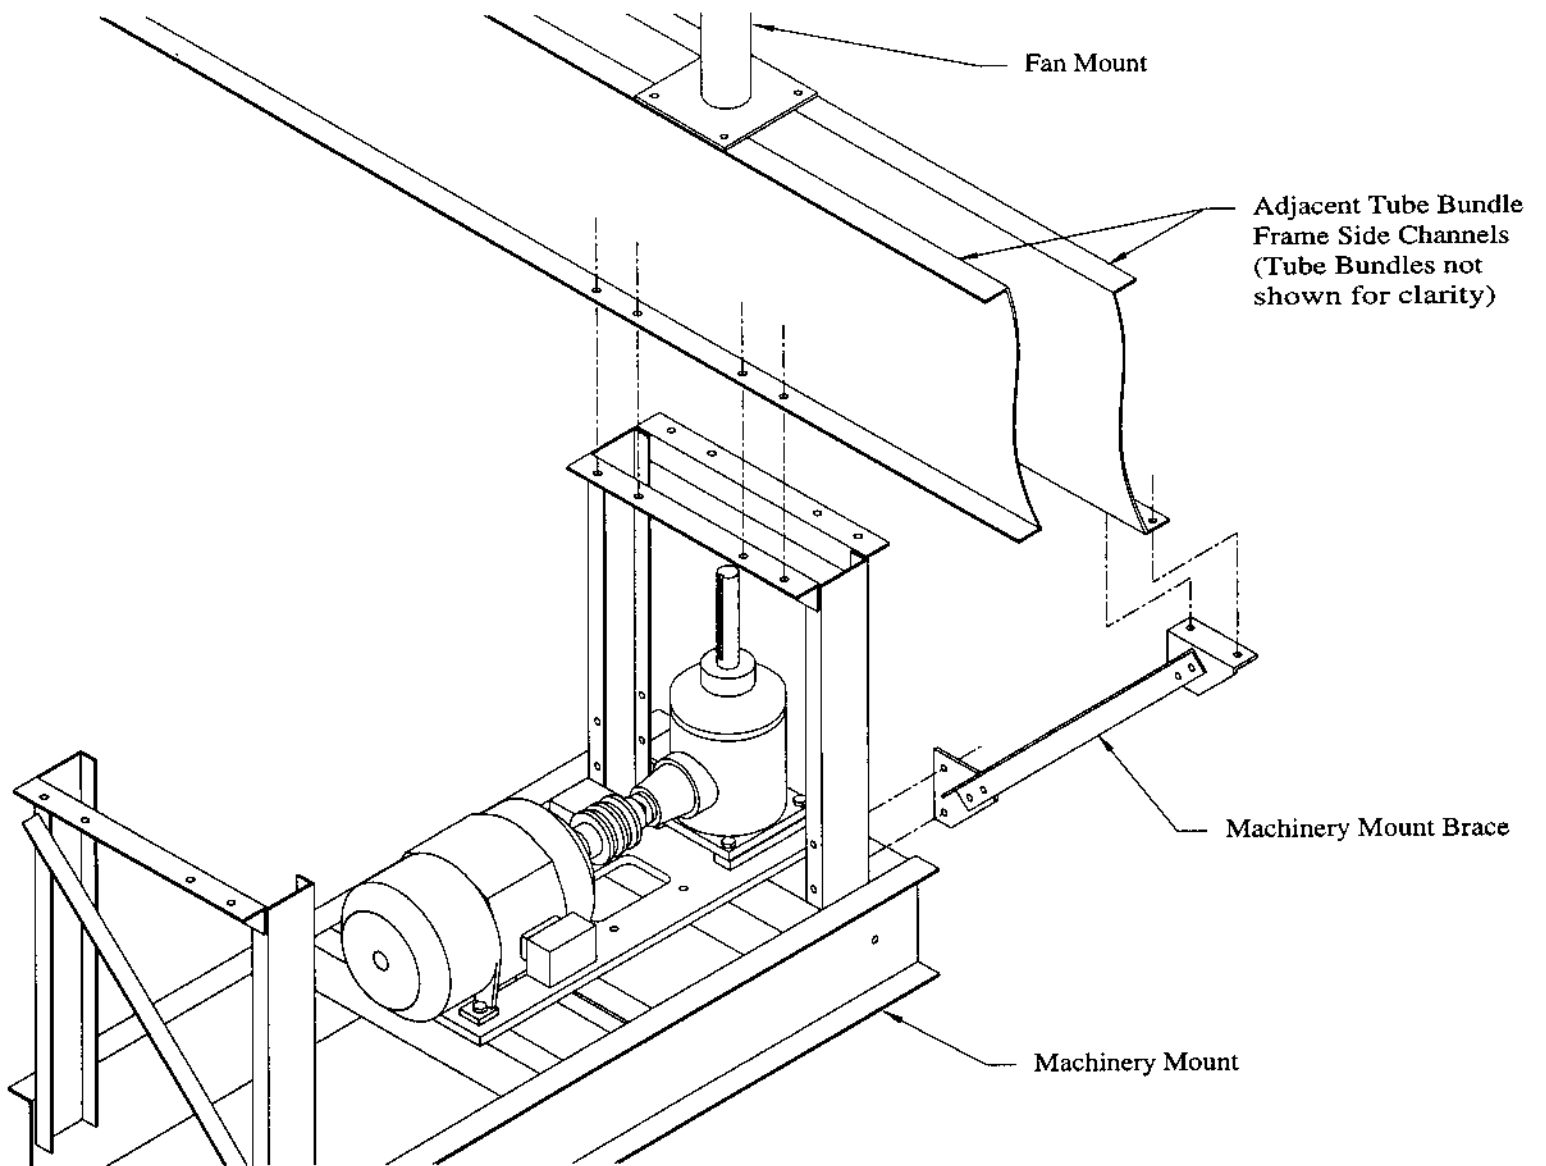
MULTI-BUNDLE MACHINERY MOUNT
